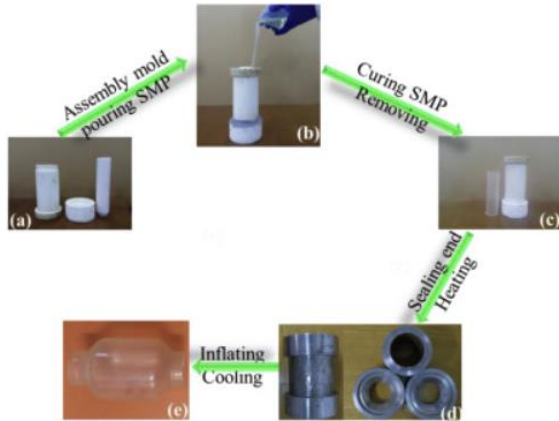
Fabrication process of bottle-shaped SMP mandrel
